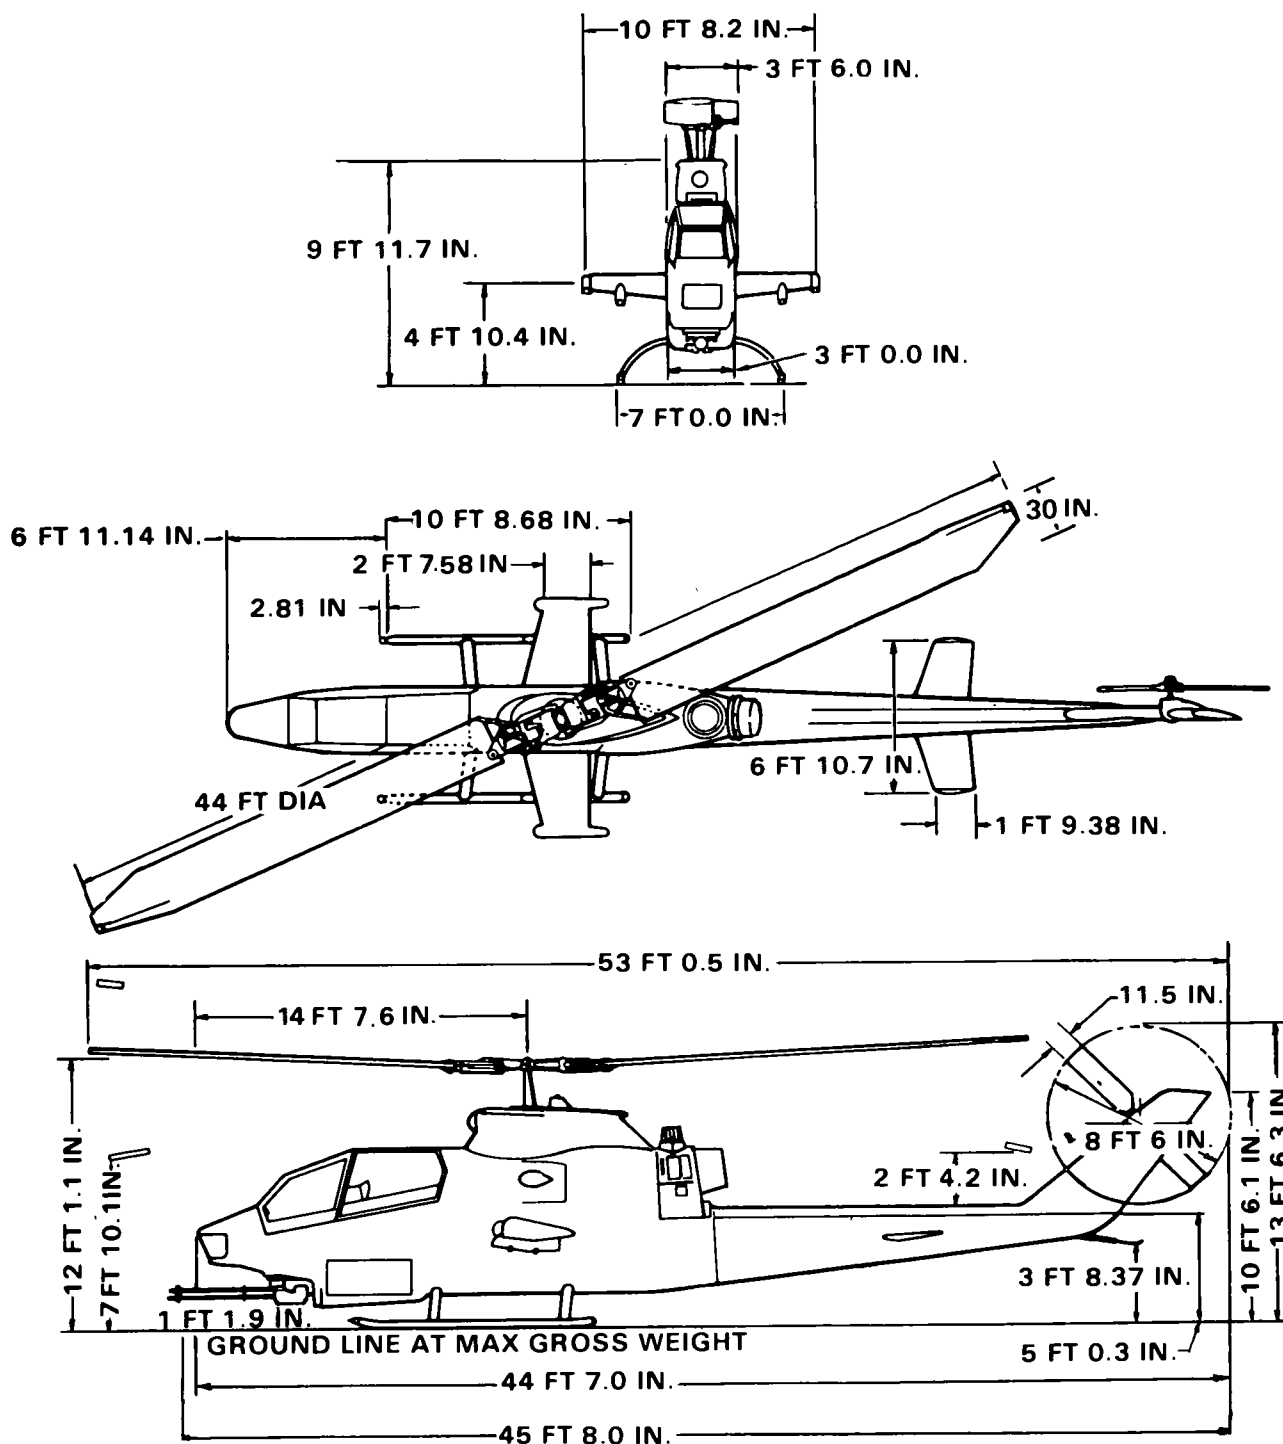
Principal Dimensions AH-1S (ECAS)
